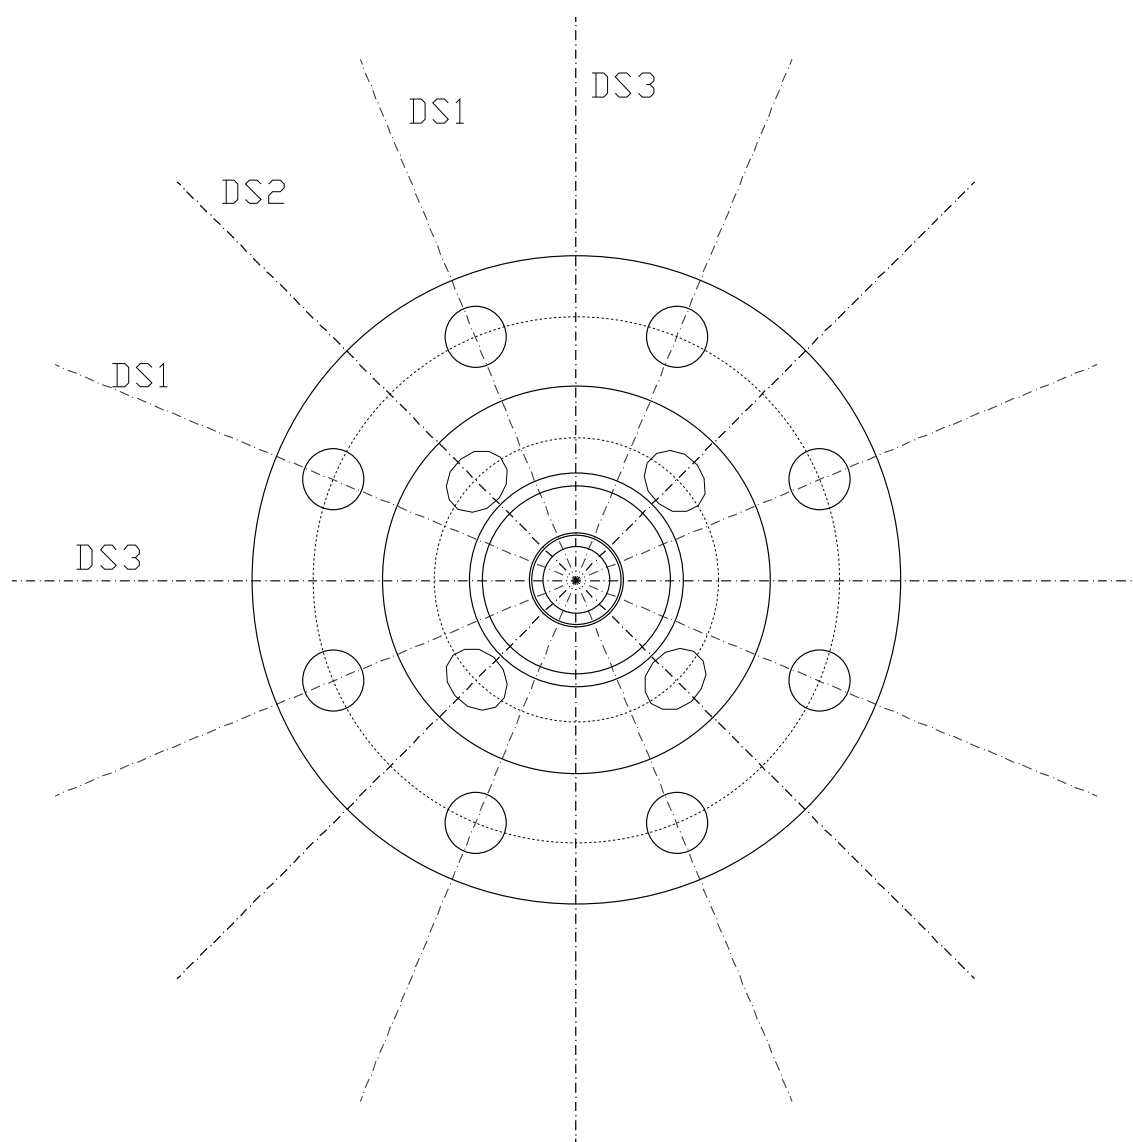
Sectional drawing HS3 of the 32.1 mL stainless steel high-pressure cell.
